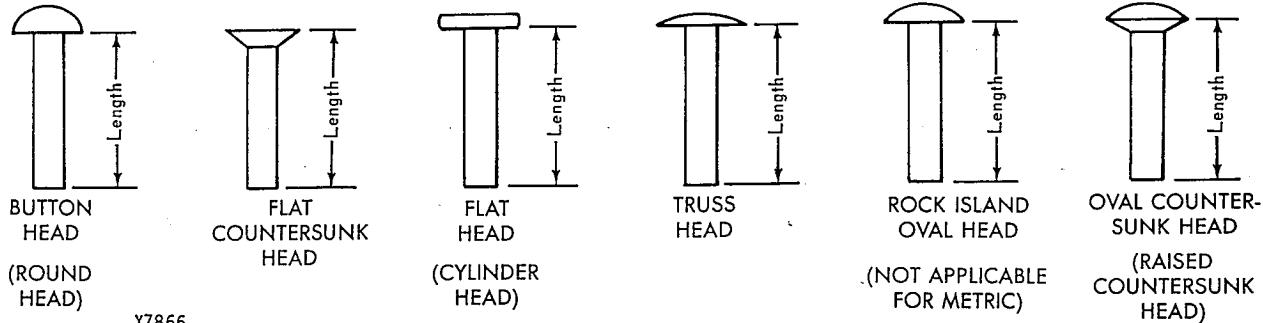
Typical Rivet Head Styles (Metric Nomenclature in Parentheses)
